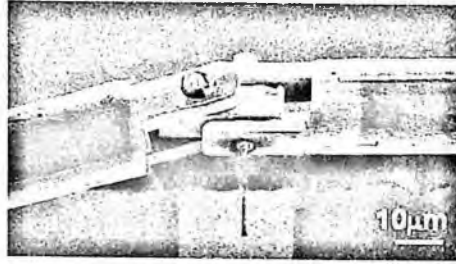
Micro universal-joint: Each of the parts is FIB-fabricated from a 25- $\mu\text{m}$  diameter Al wire and is sequentially assembled with each other using both the manipulated needle (belonging to a  $\mu$ -sampling units of Hitachi FIB system FB-2100) (Courtesy of T. Tanaka of Osaka Sangyo University).
